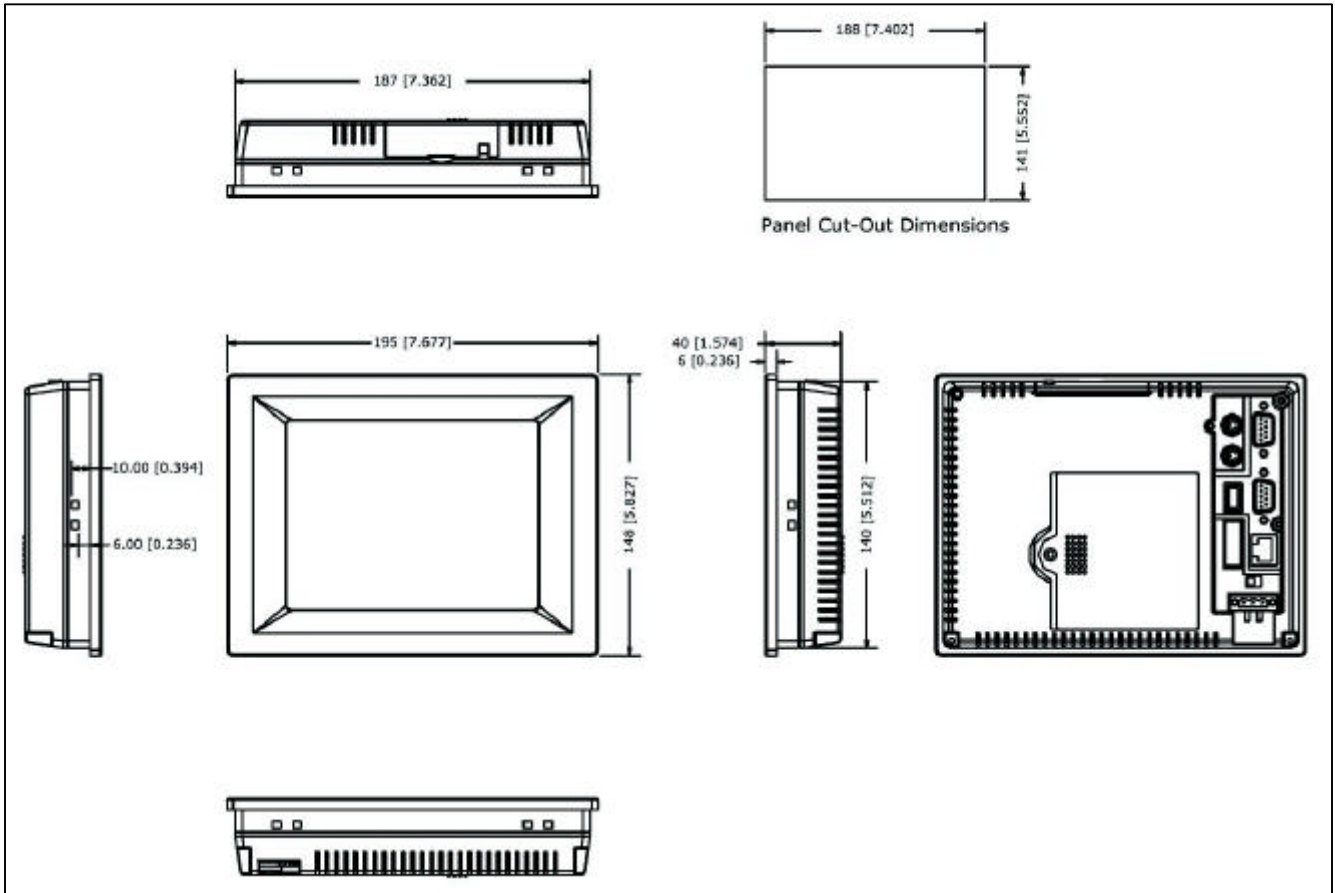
KS vario BT dimension drawing, all dimensions in mm [inch]
